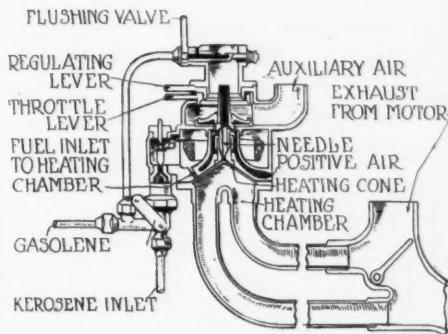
SECTIONAL DIAGRAM OF KNOX CARBURETER
